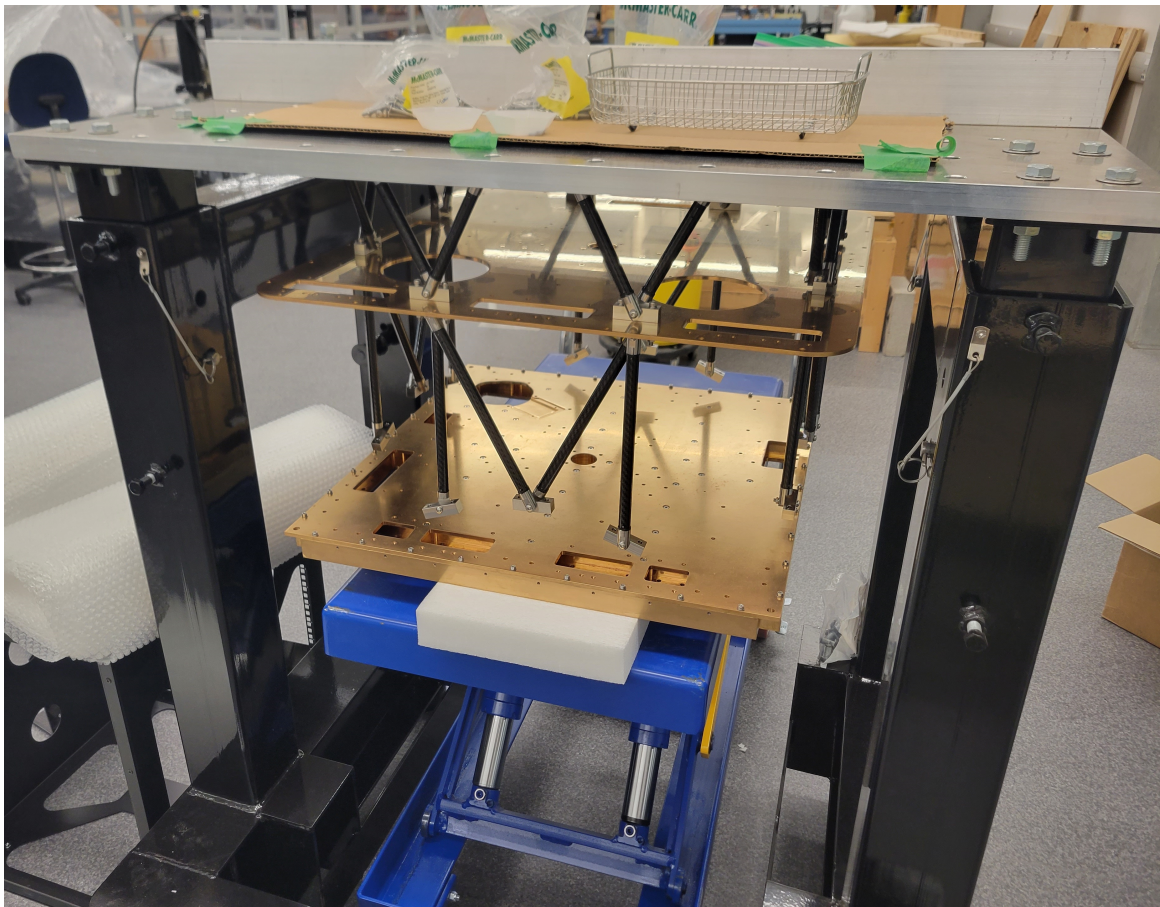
Assembly of the LFC cold structure. The 4 K upper cold plate is being raised using a hydraulic lift cart before being mounted to the hanging CFRP struts.
